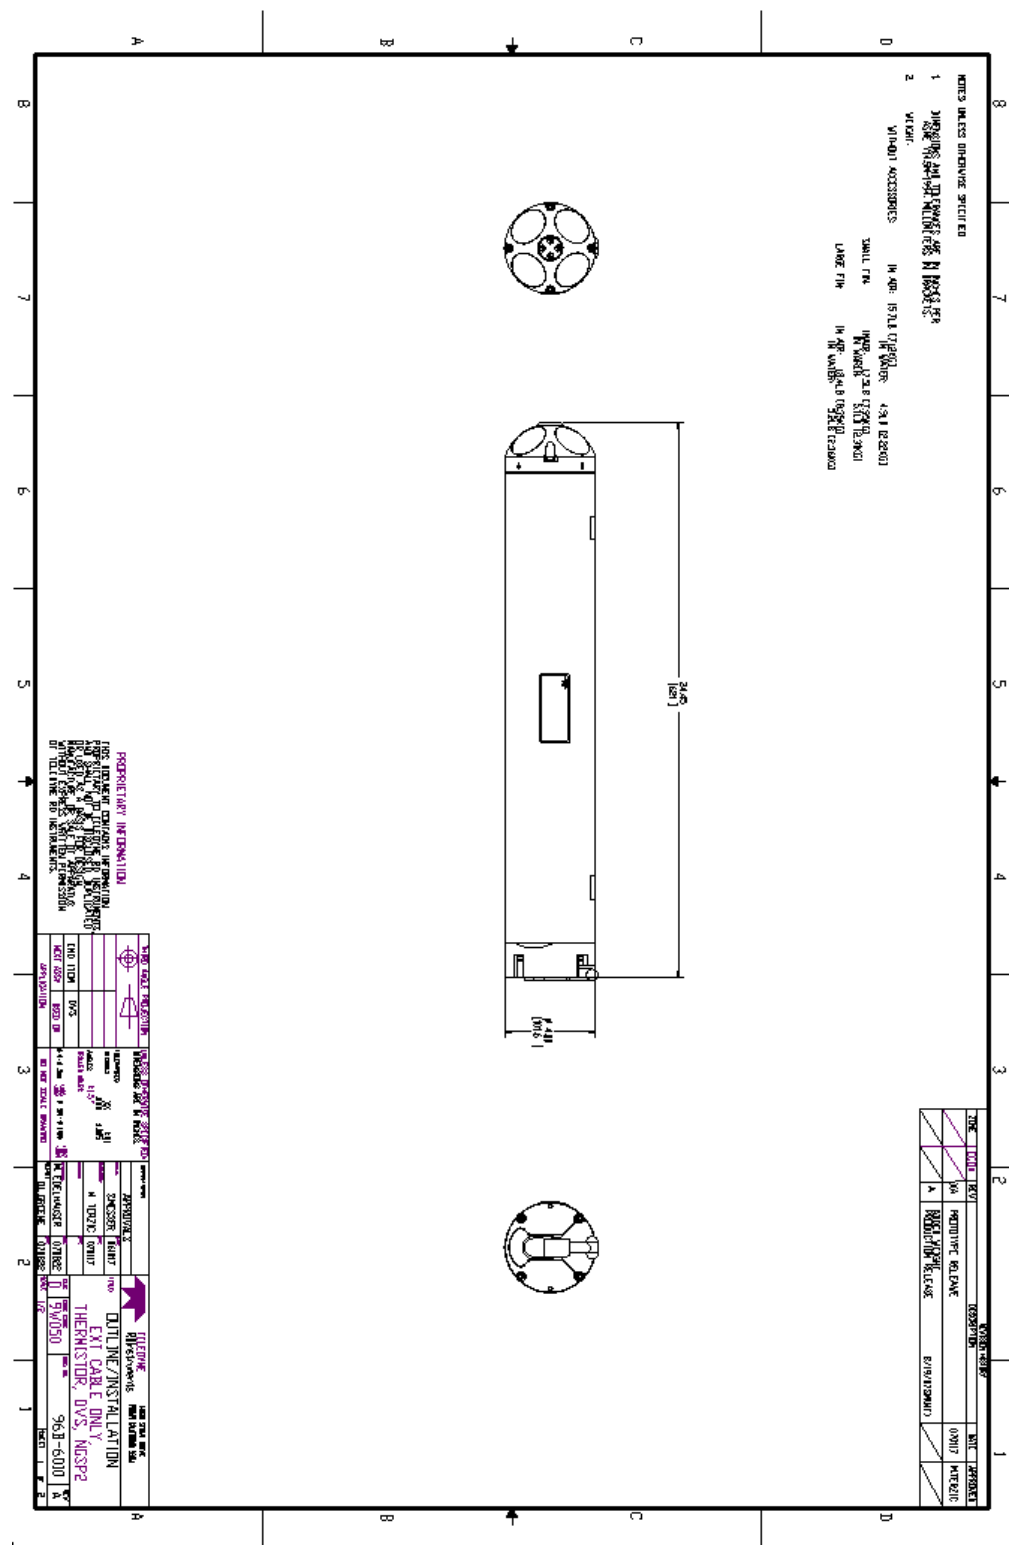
Outline Installation Drawing 96B-6008 Sheet 2
